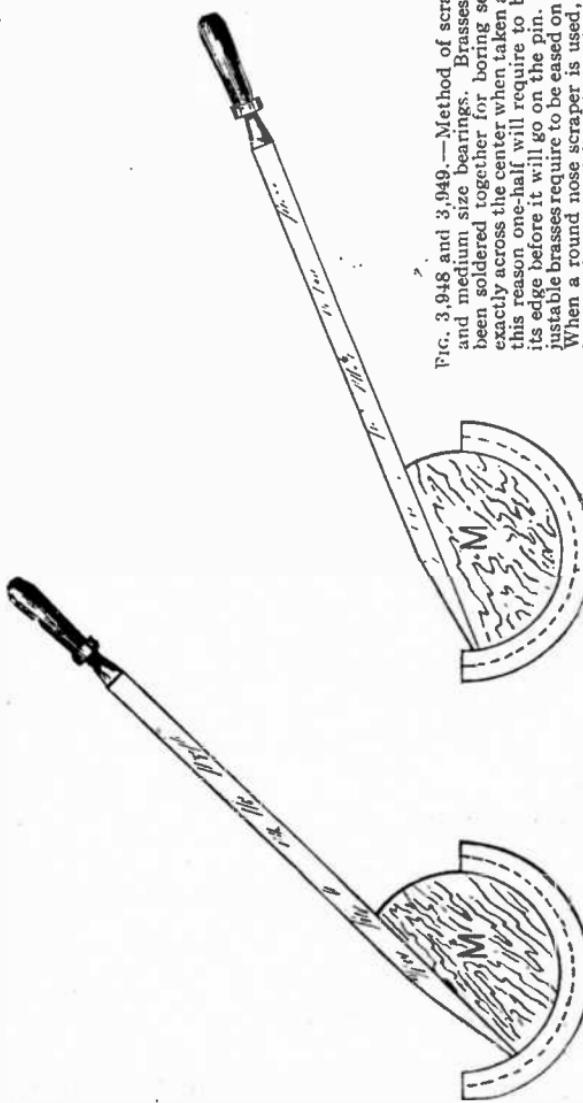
,948 AND 3,949.—Method of scraping small and medium size bearings. Brasses that have been soldered together for boring seldom split exactly across the center when taken apart. For this reason one-half will require to be eased at its edge before it will go on the pin. Many adjustable brasses require to be eased on their sides. When a round nose scraper is used, a series of furrows is cut axially along the brass; and further, these furrows cannot be commenced at the edge of the brass, nor can they be carried with uniformity to the other end of the brass. When a half-round scraper is used the results are far from perfect. In the first place, a half-round scraper is not a tool on which a great deal of pressure can be easily applied, owing to the manner in which it has to be handled. A further disadvantage lies in the fact that it is practically impossible to apply the operating force at a constant angle to the surface being scraped. Exactly the same remarks apply to the cutting angle, which cannot be maintained at a constant angle, to the cylindrical bore of the brass. The illustration shows a very useful method of scraping out small and medium sized brasses. In the figure, M., is an approximately semi-cylindrical piece of wood which is placed in the vise or elsewhere. The flat scraper handle is lowered so that the latter being securely held in the vise rests with its flat side upon this wooden guide, and its cutting edge against the surface of the brass. Now, as the scraper handle is lowered, the wooden rest revolves in the brass, and as the scraper rests with its flat side upon M., the flat side always remains constant. It will be obvious to any practical engineer that a great deal of pressure can in this way be applied to the cutting edge, and long, wide uniform cuts can be taken with ease.
